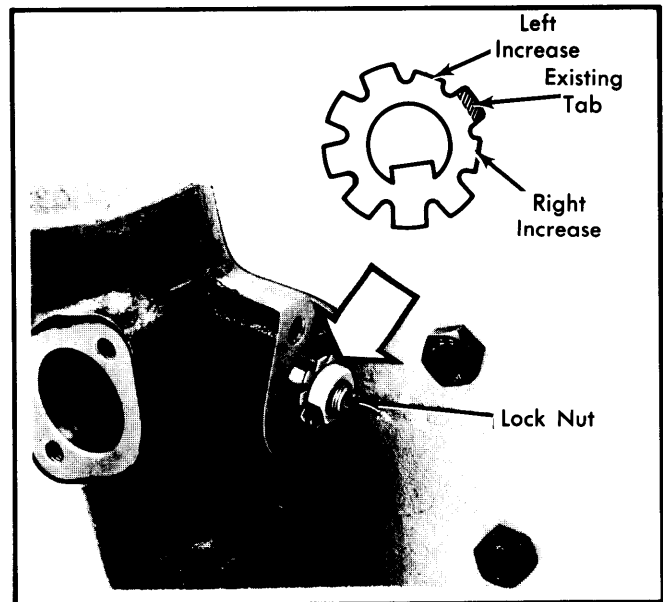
Adjusting Lock Washer on Cam Gear Type Power Steering
